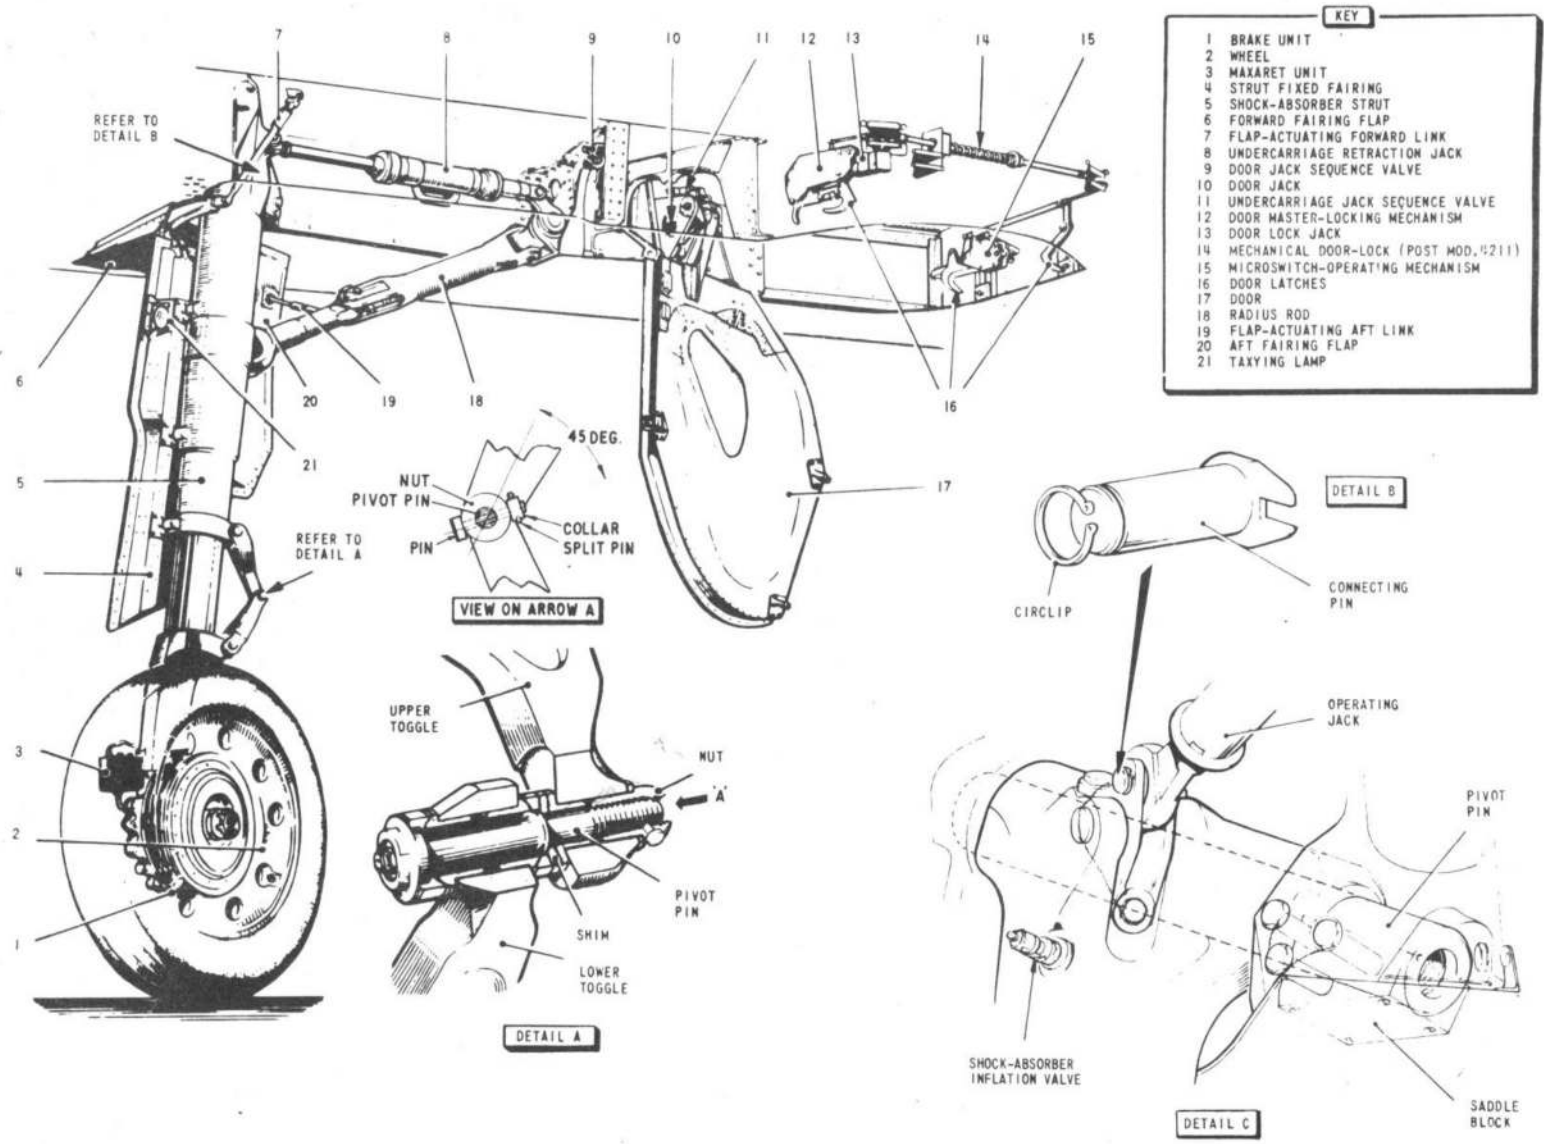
MAIN UNDERCARRIAGE ASSEMBLY
